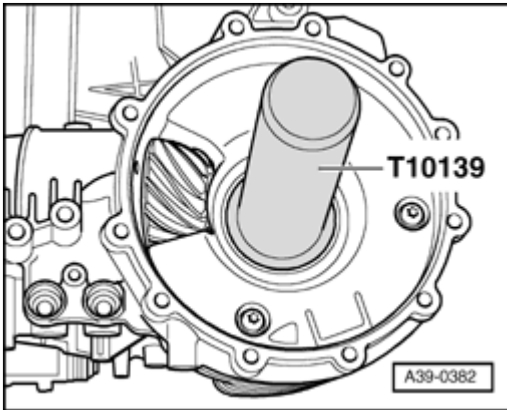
Driving In New Oil Seal As Far As Stop Using Thrust Piece T10139
